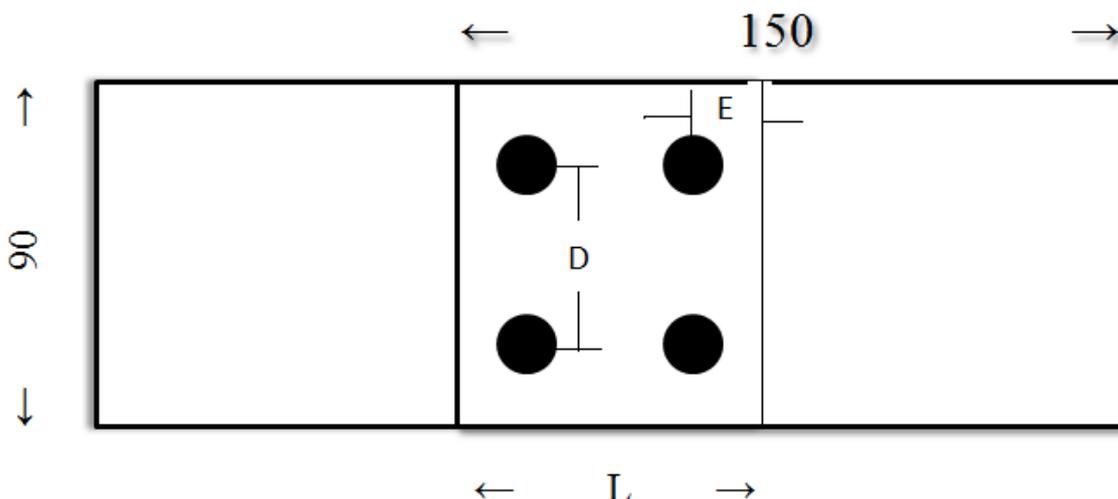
Dimensions of Specimen (all dimensions in mm)
